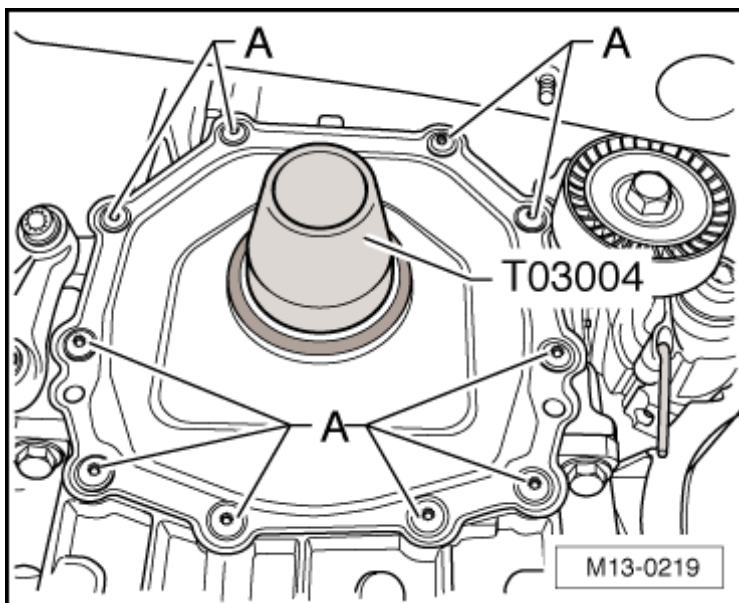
Identifying Sealing Flange Inserted Using Assembly Sleeve T03004 On Crankshaft Journals And Pressed Uniformly On Cylinder Block
